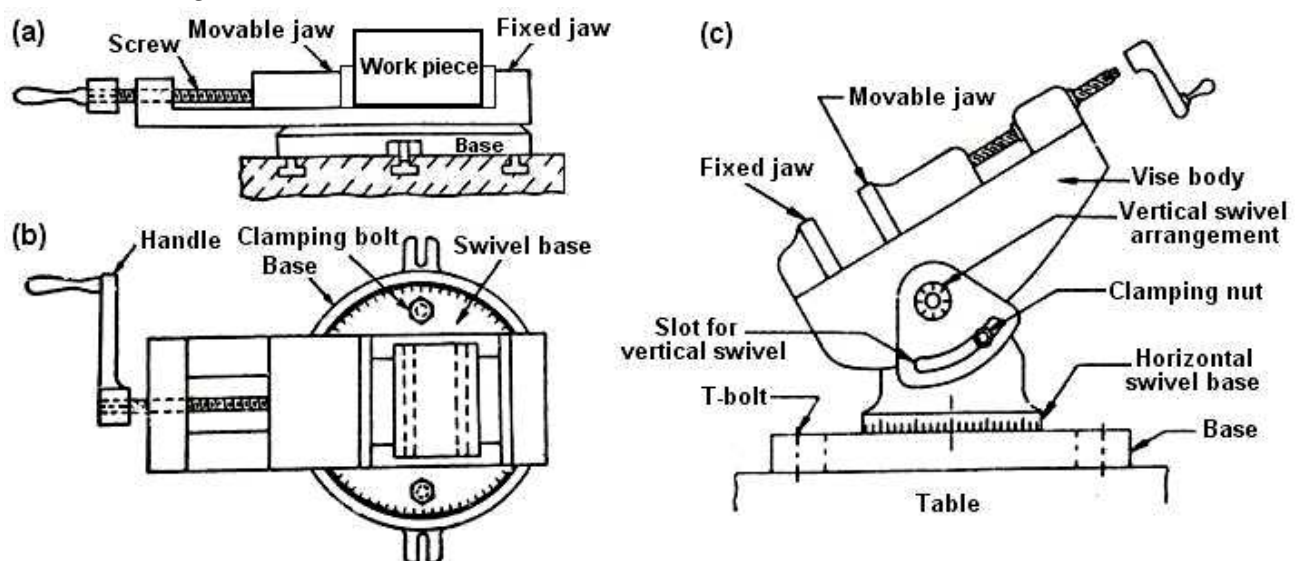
Machine vise (a) Plain vise (b) Swivel vise and (c) Universal vise
